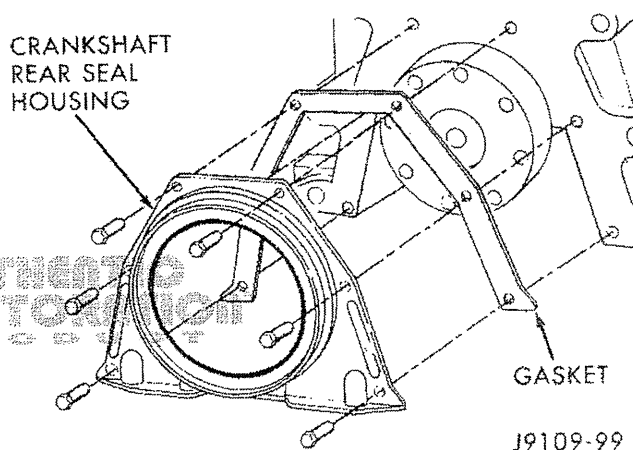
Crankshaft Rear Seal Housing/Gasket
